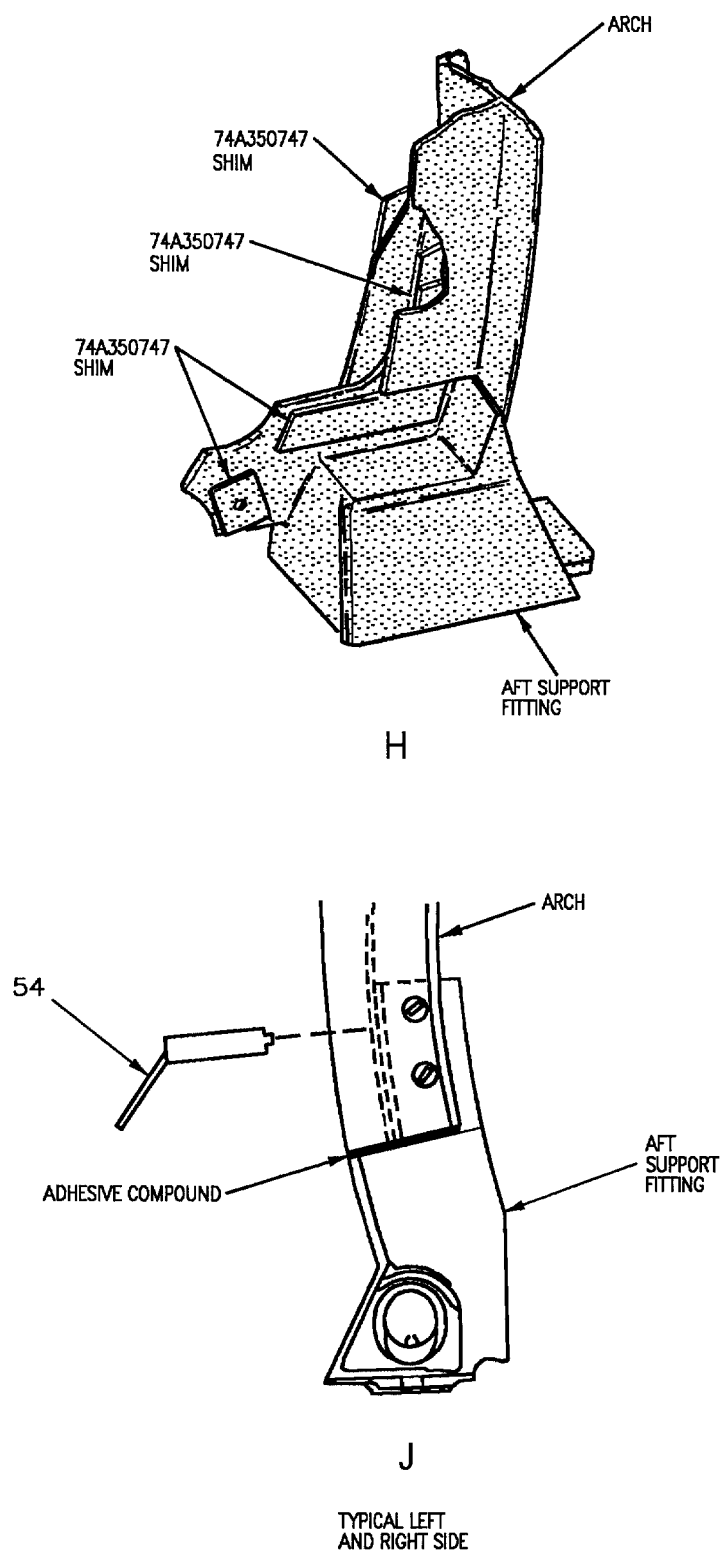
Inspection or Replacement - Aft Support Fitting (Sheet 5)
